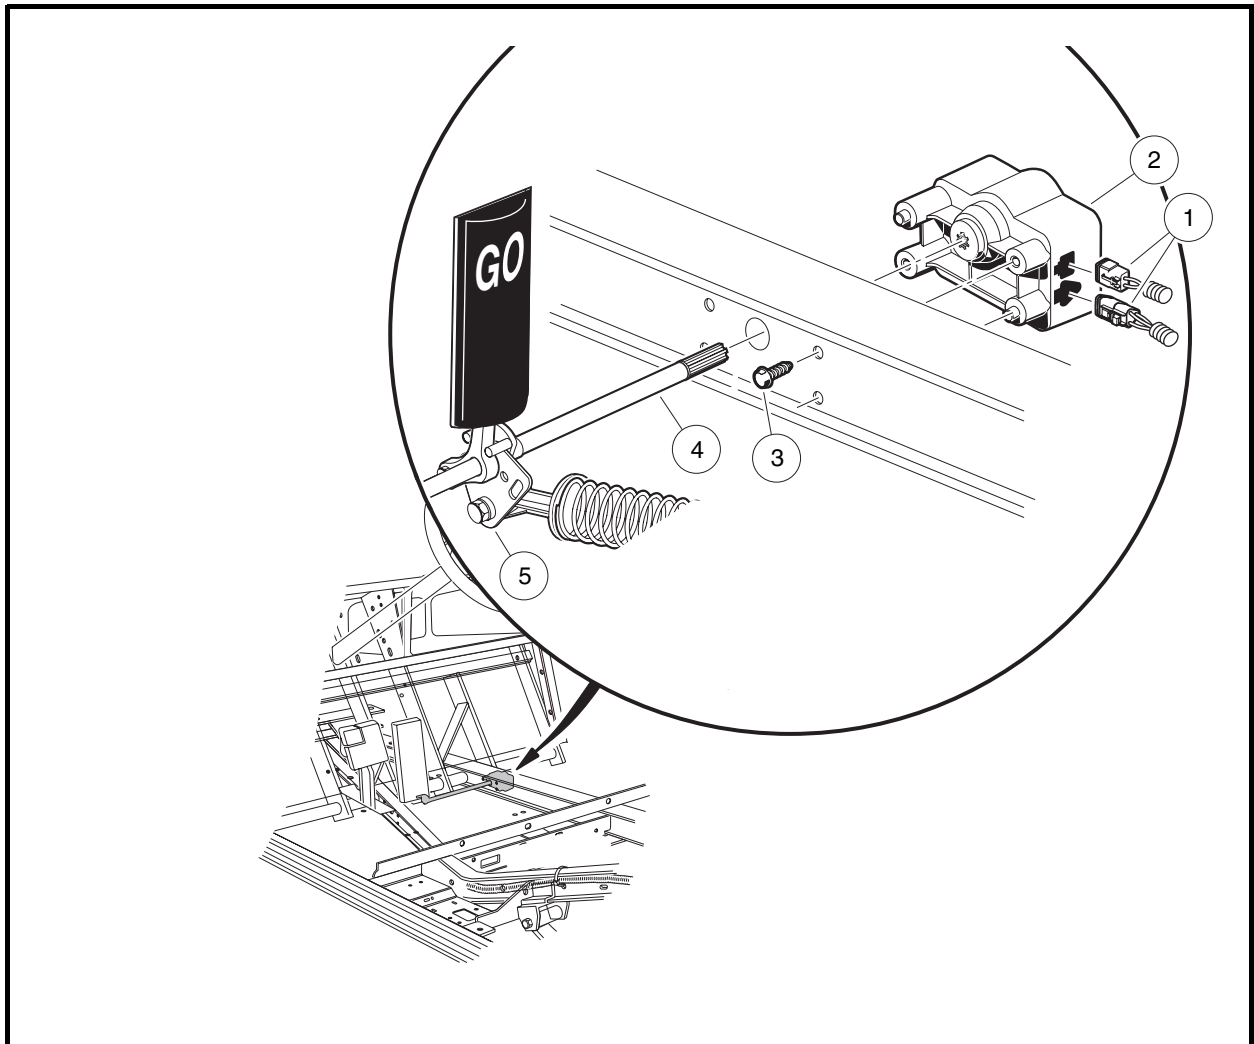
Motor Controller Output Regulator (MCOR) Mounting
